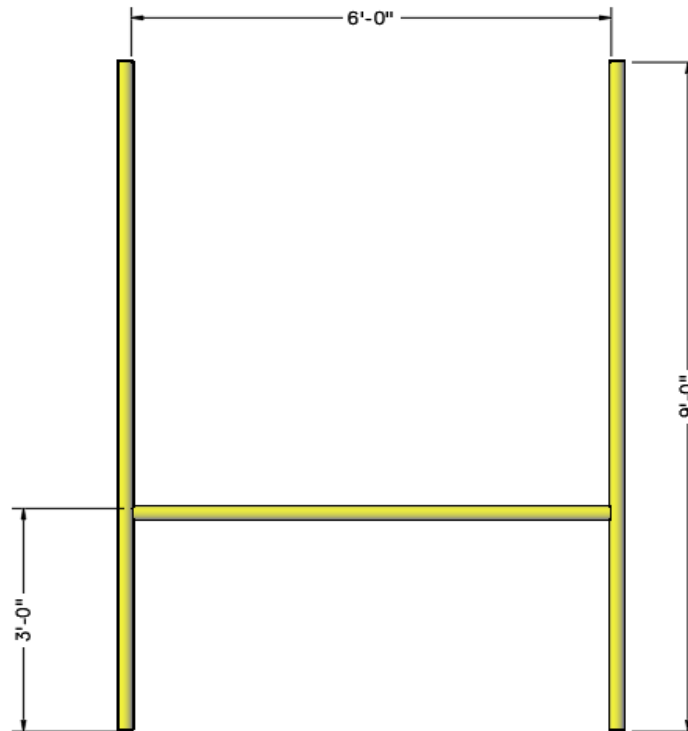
Goalpost Dimensions. Any pipe or tubing can be used that stays standing and meets the dimensions as shown above.
